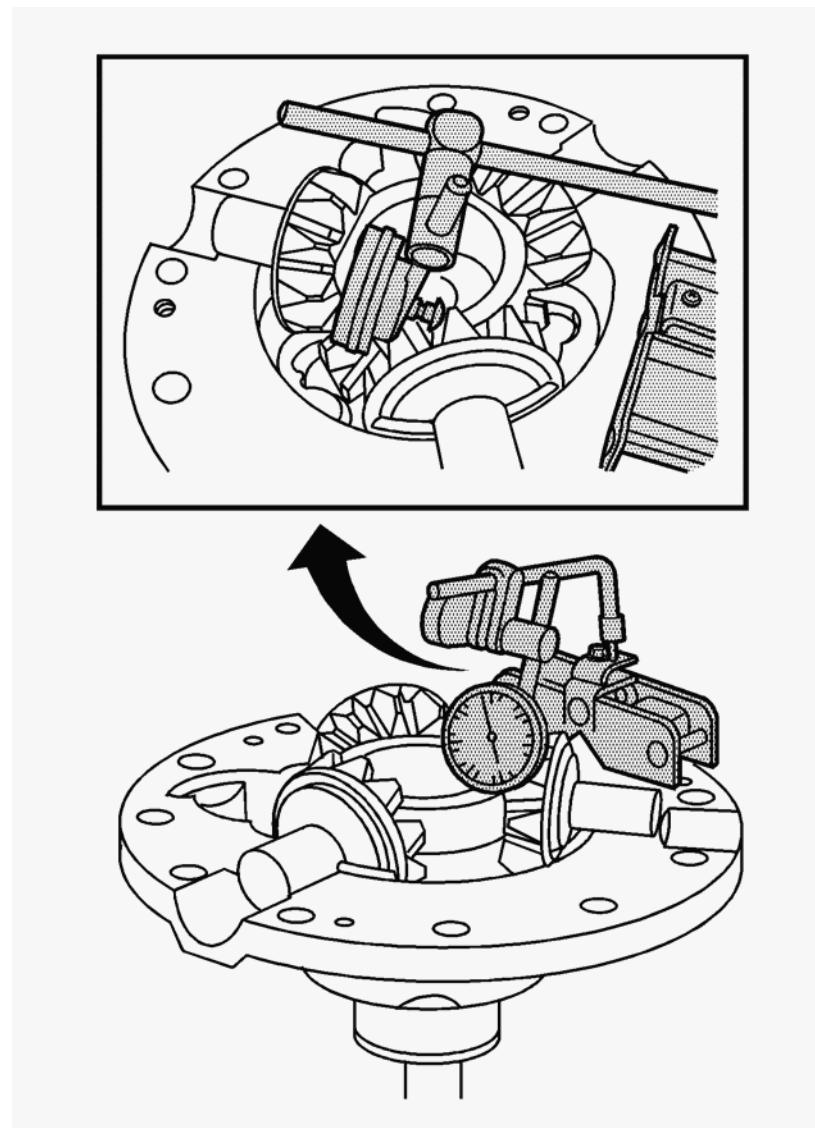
Measuring Differential Pinion Gear To Locking Differential Side Gear Backlash
